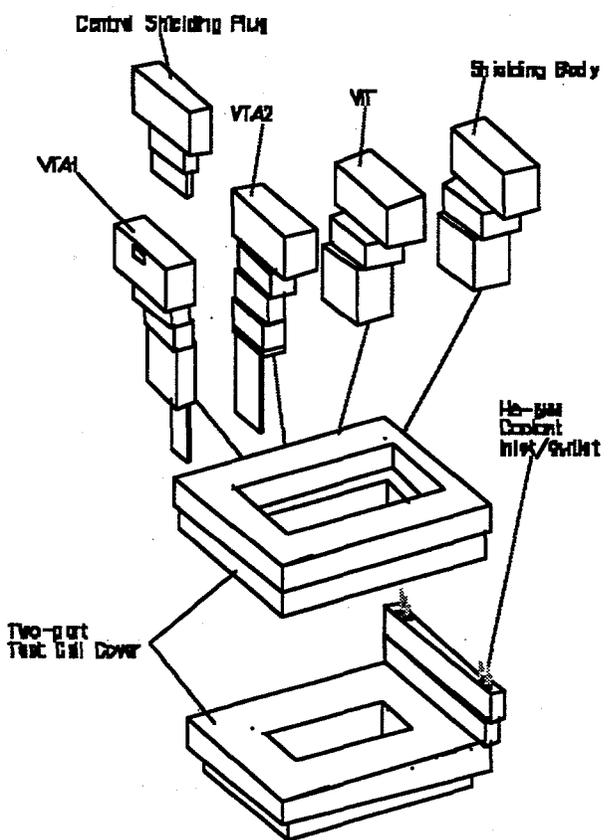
Two-part Test Cell removable Cover
